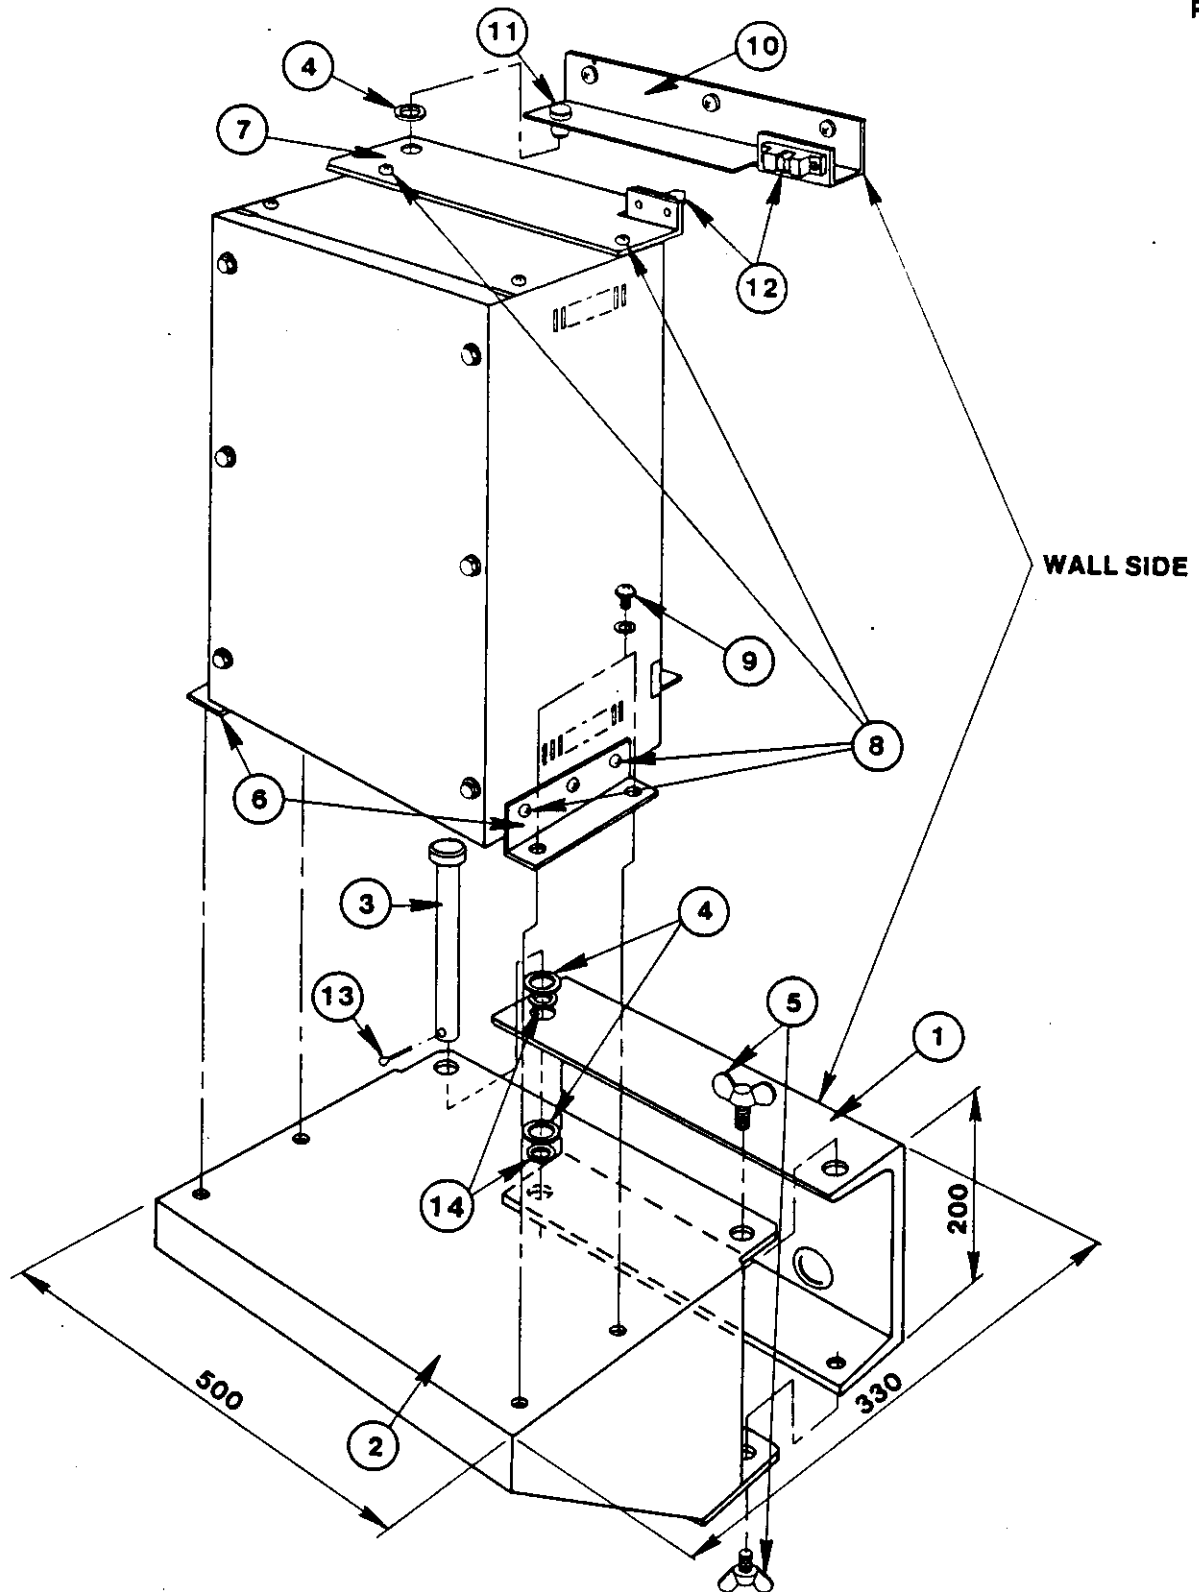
WALL MOUNT KIT ASSEMBLY DIAGRAM
